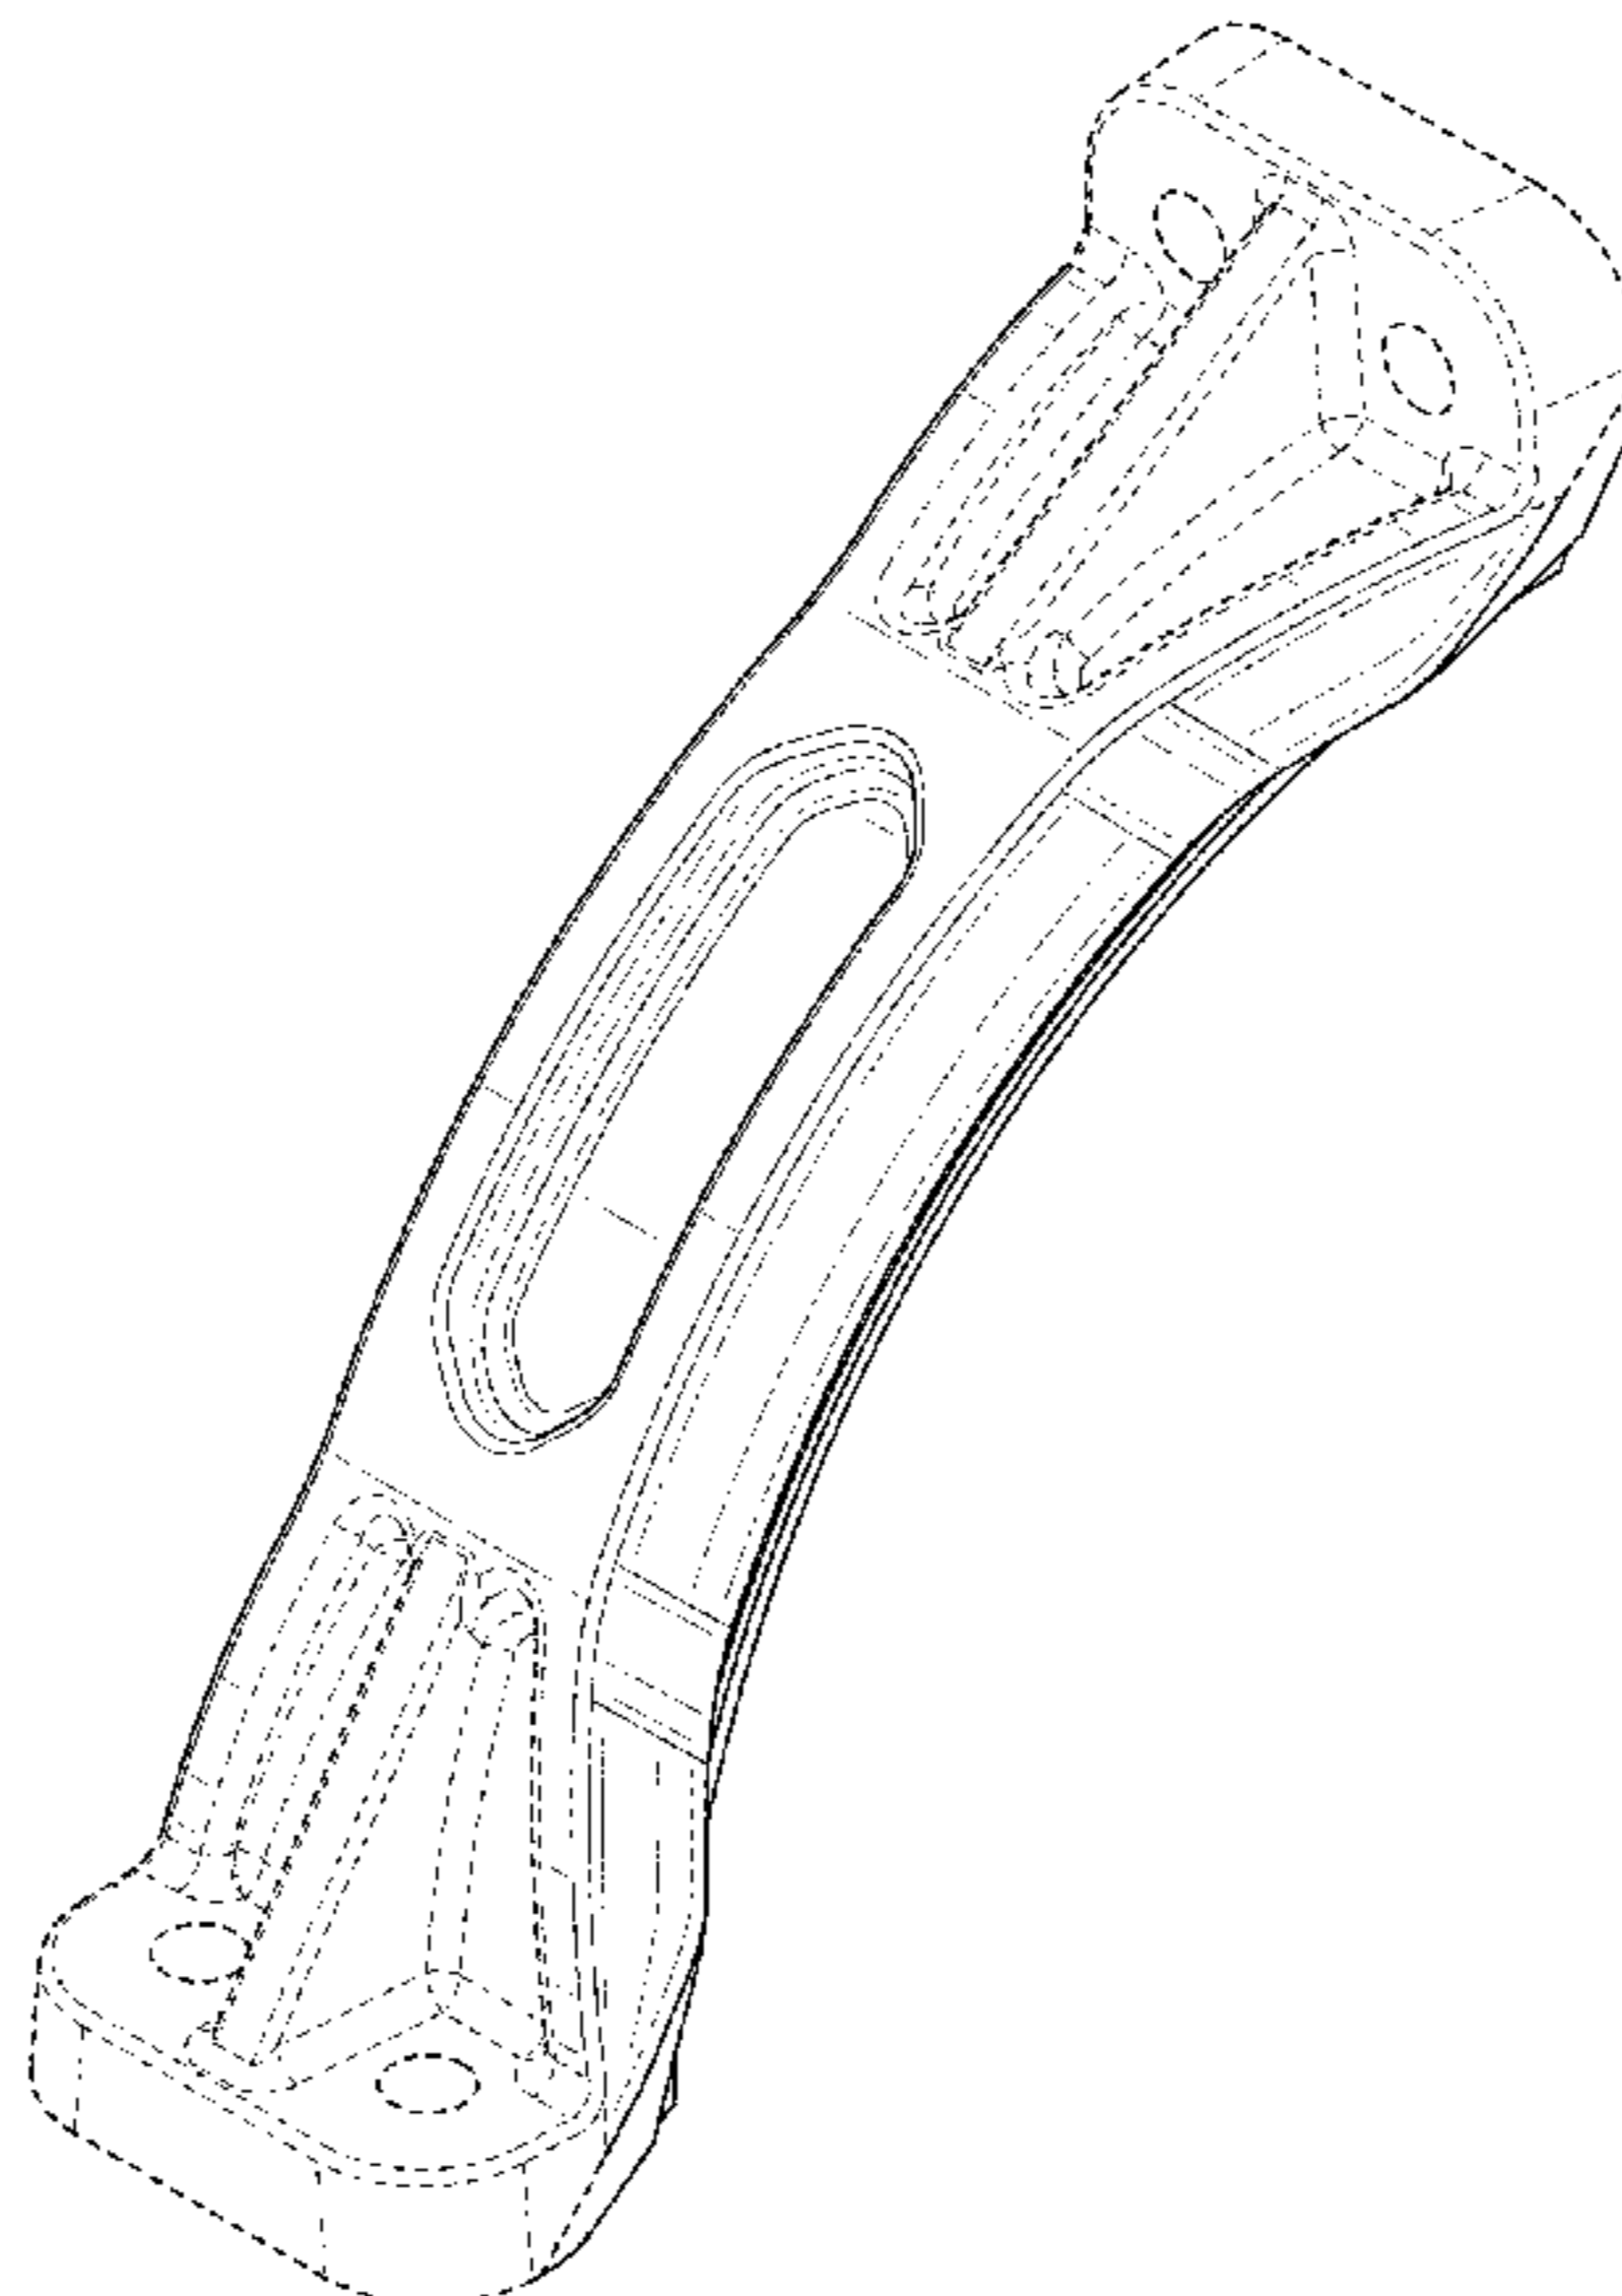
is a right side view of the design of the coupling segment shown in FIG. 1, the left view being a mirror image thereof;
